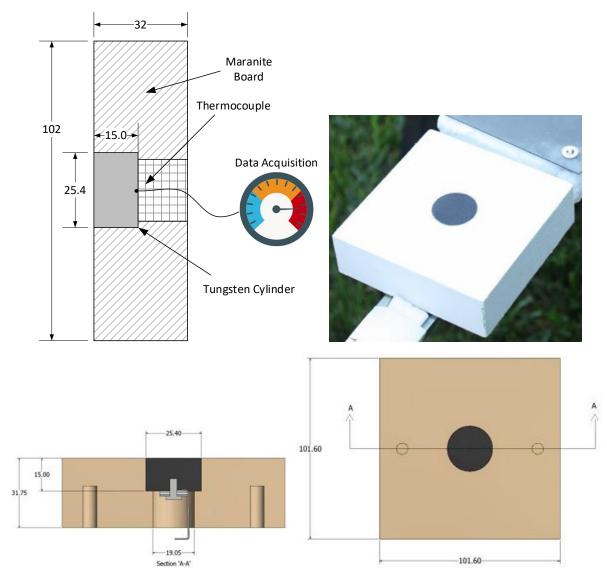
Thermal capacitance style slug, illustration (top left), photo of device being prepared in the field (top right), dimensional drawings showing internal construction (bottom left and right). All nominal dimensions in mm.
